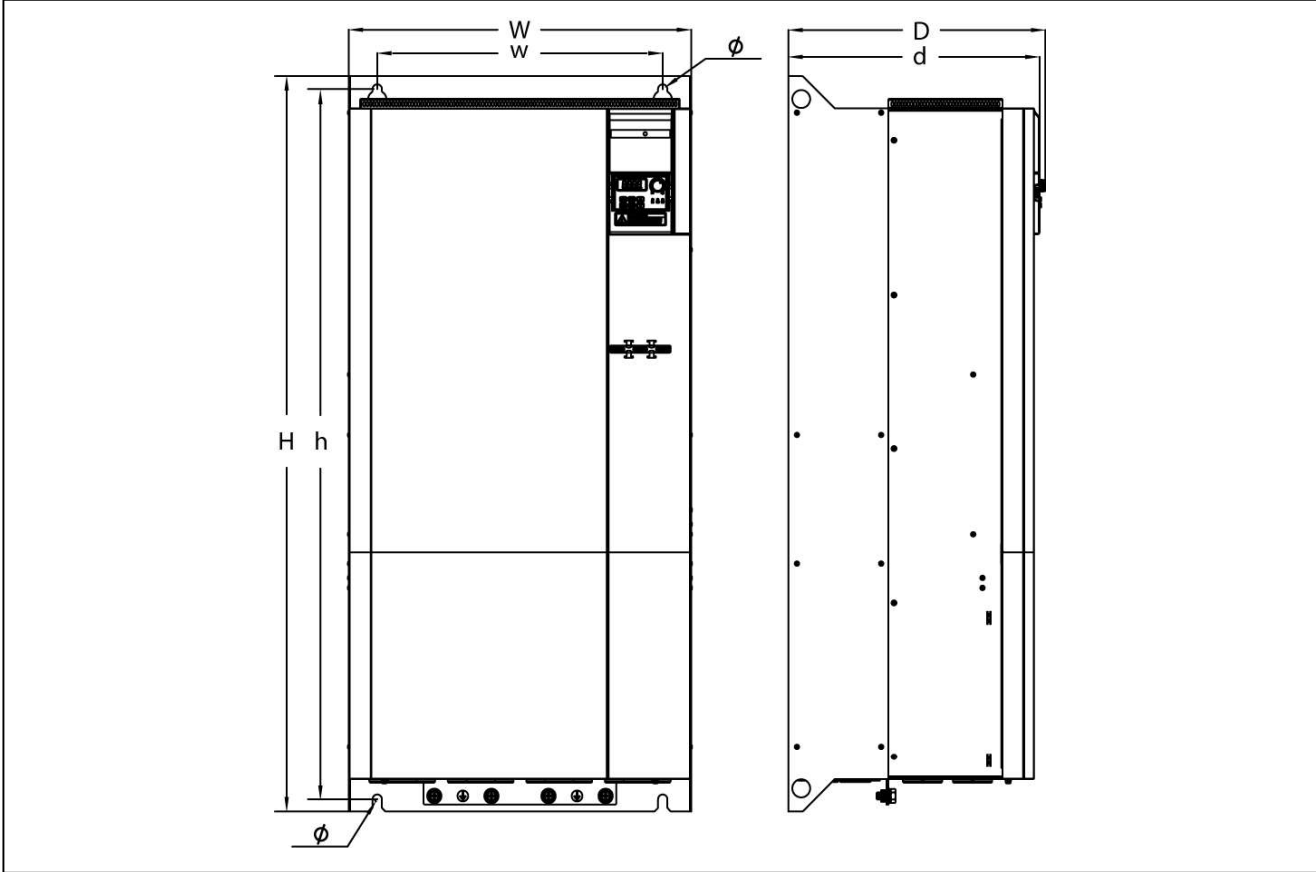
VFC 5610 160K...185K dimensions figure
